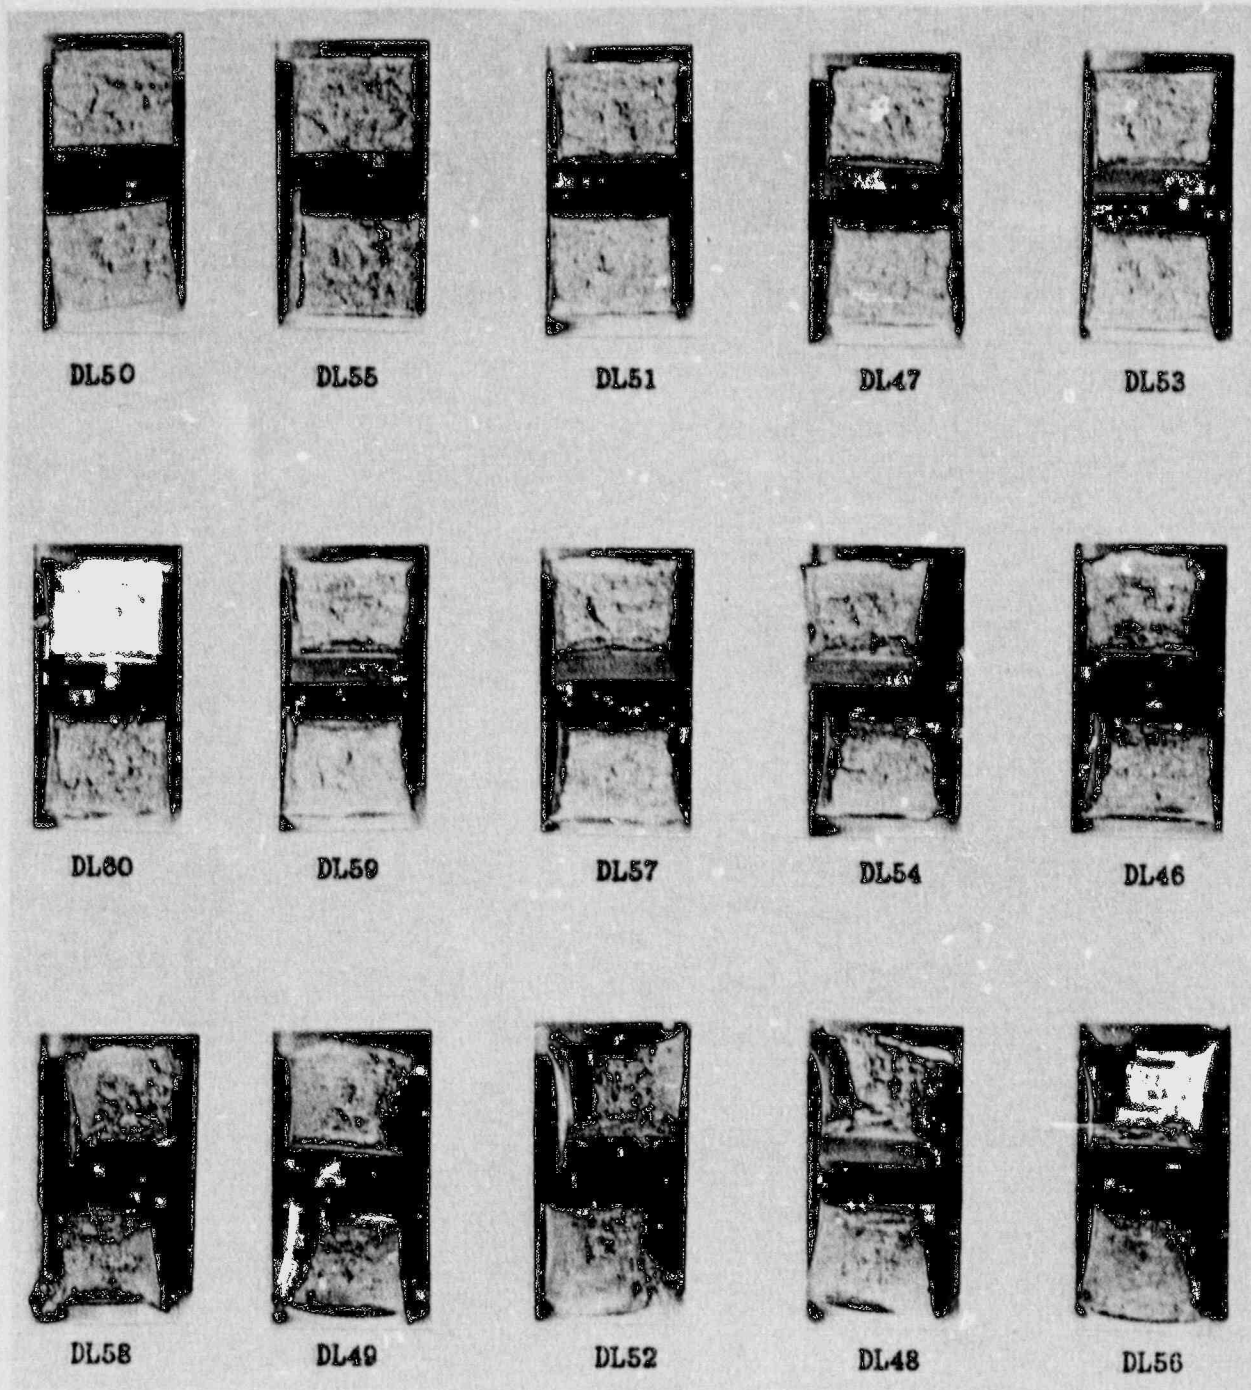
CHARPY IMPACT SPECIMEN FRACTURE SURFACES FOR MCGUIRE UNIT 1 REACTOR VESSEL SHELL PLATE B5012-1 (LONGITUDINAL ORIENTATION)
